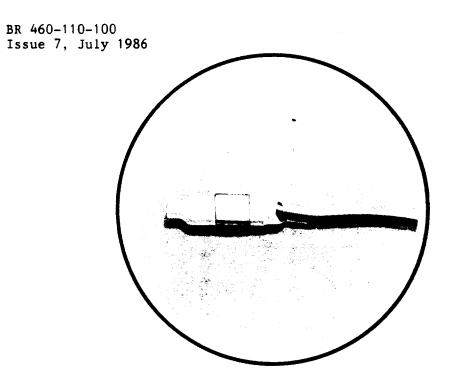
Warning Marker Form EO-5190 Installed on B Wire Marker
